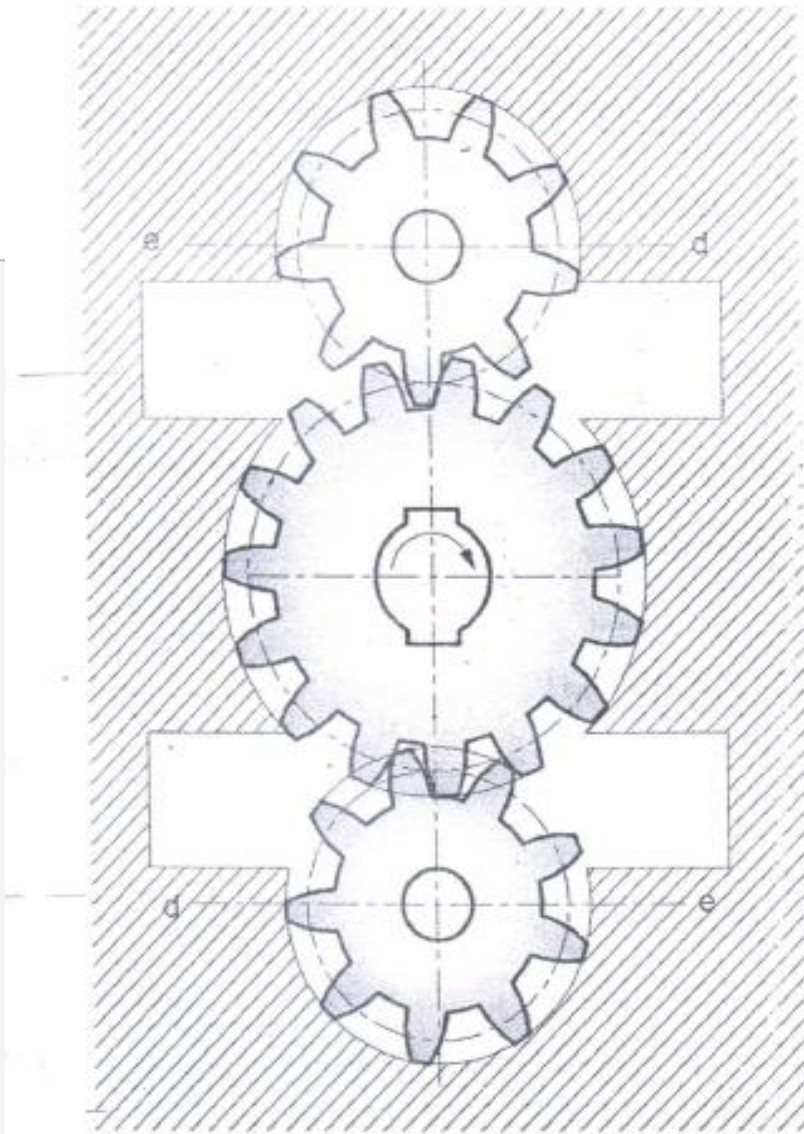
External Gear Pump (Spur Gear)
